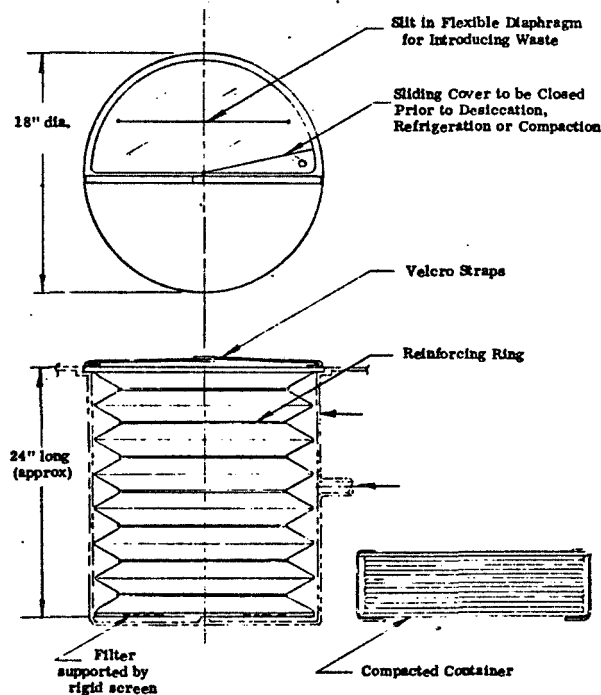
Bellowed Collection/Compaction Container - Soft Wall
